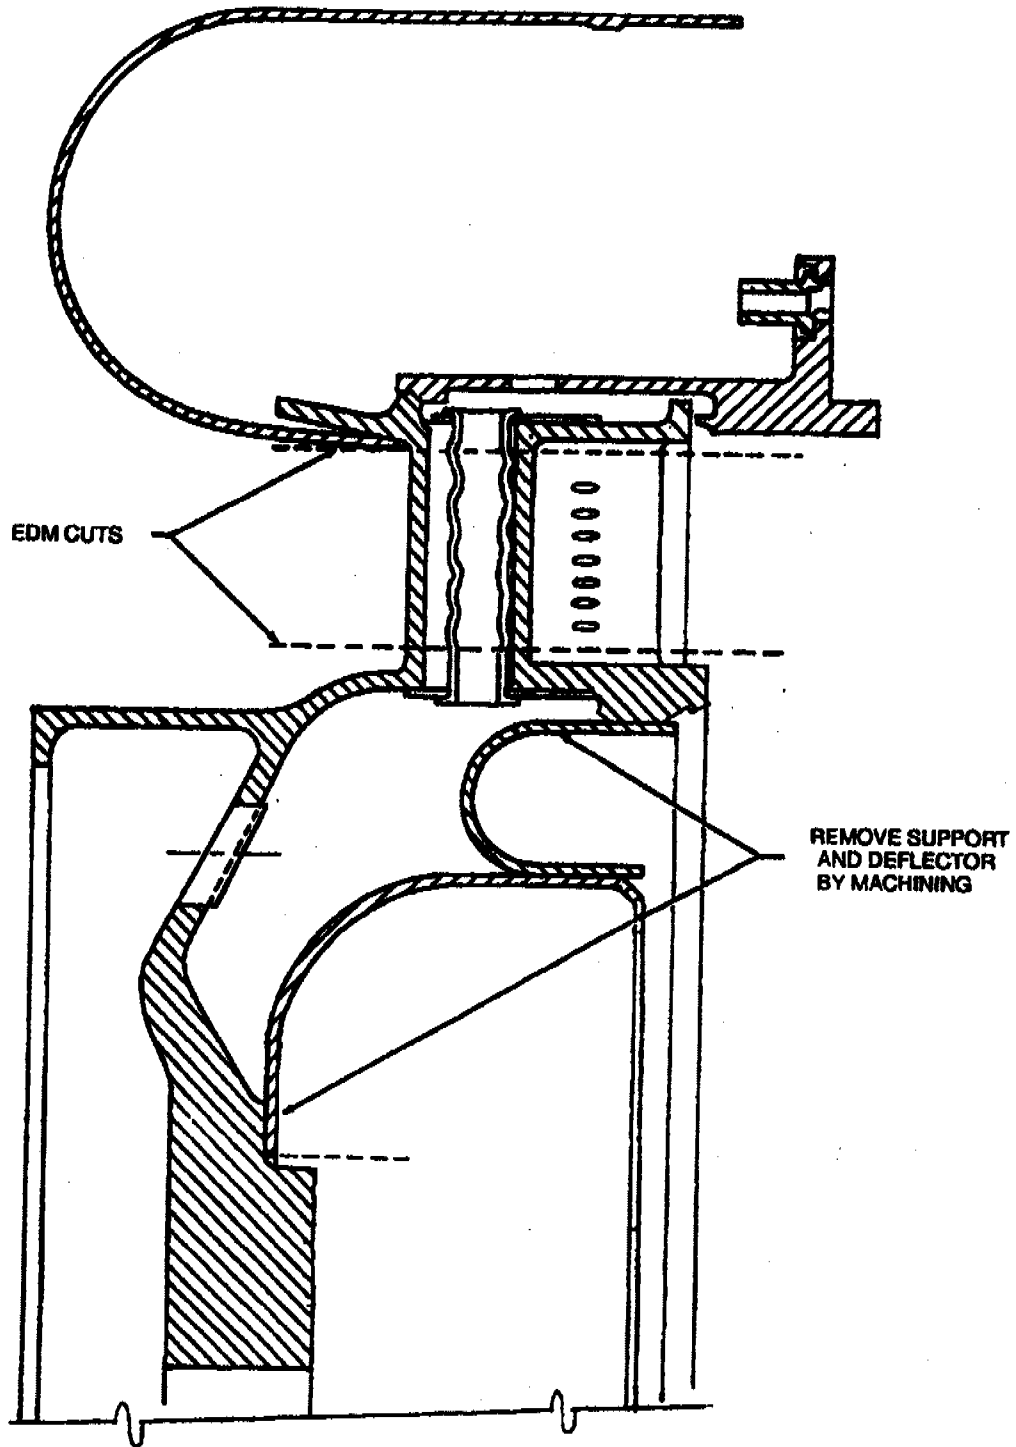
Stage 1 G.P. Nozzle (P/N 1-110-710-06) Removal of Support and Deflector.
